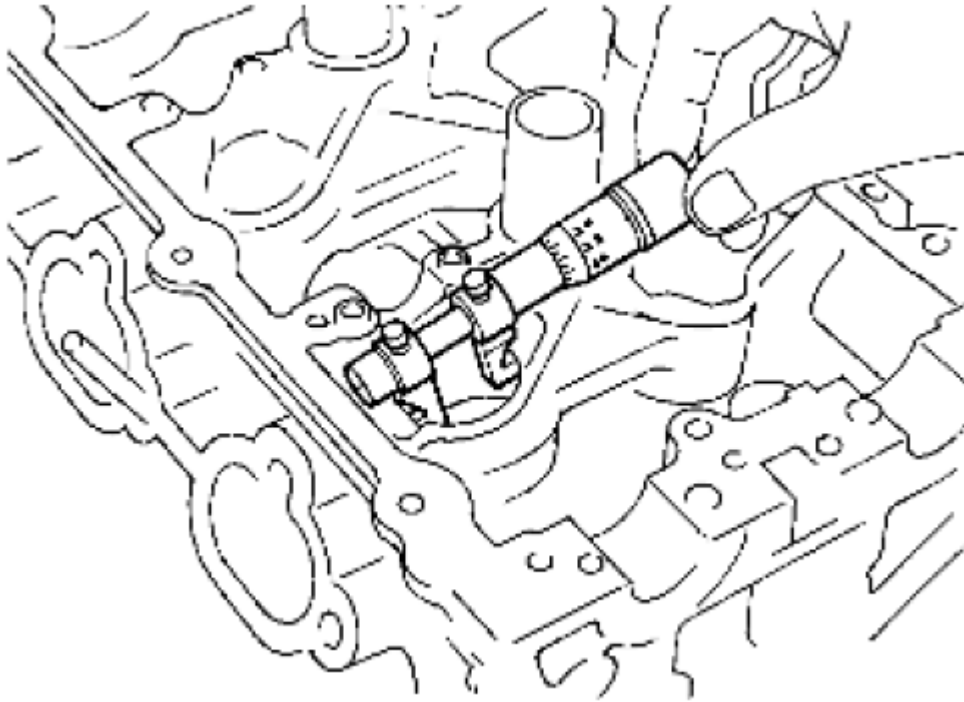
Measuring Inner Diameter Of Valve Lifter Hole Of Cylinder Head With Inside Micrometer
